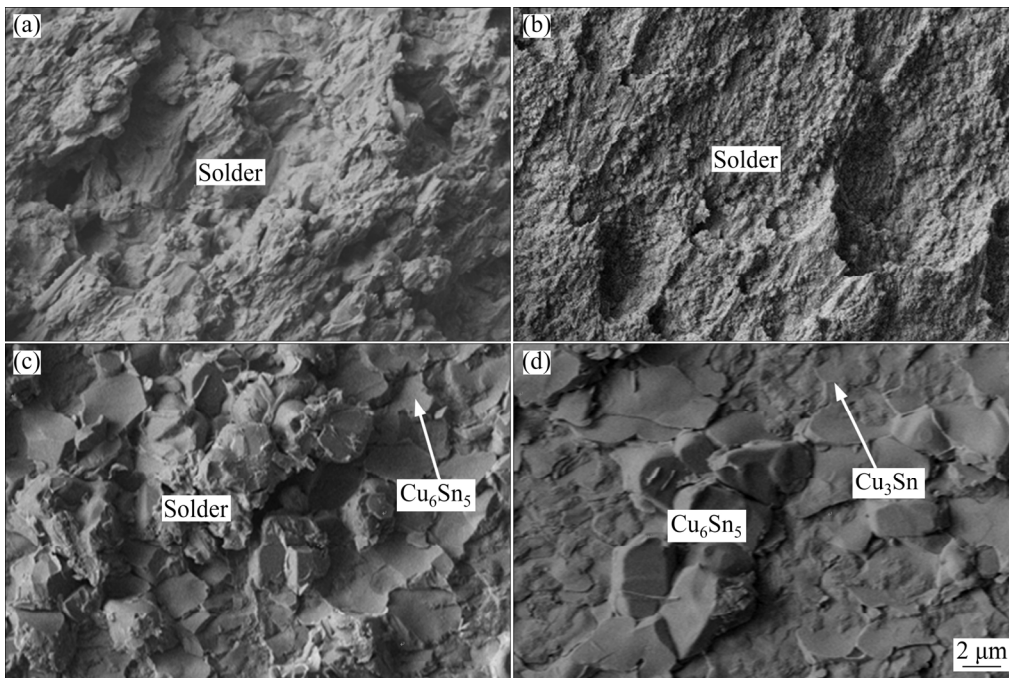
Fracture surface morphology of mixed solder joints with 4.67 wt.% Pb at different temperatures: (a) 298 K; (b) 223 K; (c) 173 K; (d) 123 K
